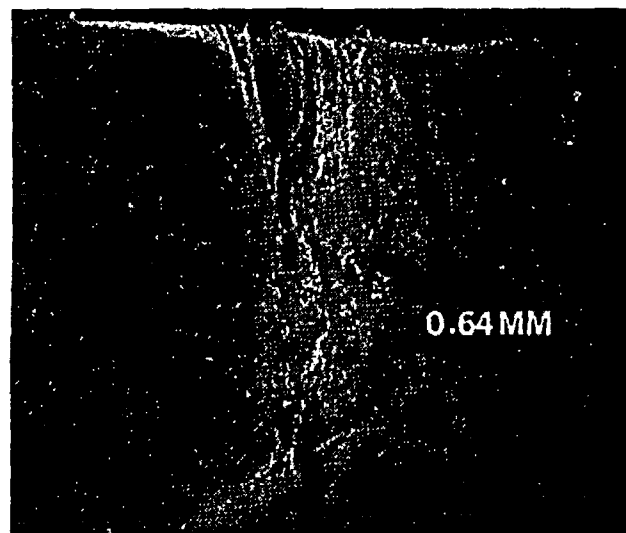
Higher Magnification Fractograph of Cracking in the Circled Area of the "O" Ring.
